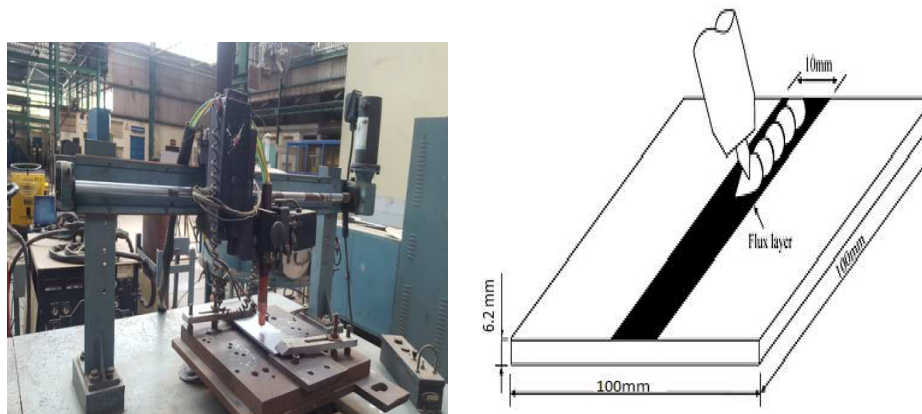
Kemppi Master TIG 4000 Welding Machine and Schematic Diagram of PFTIG Welding
